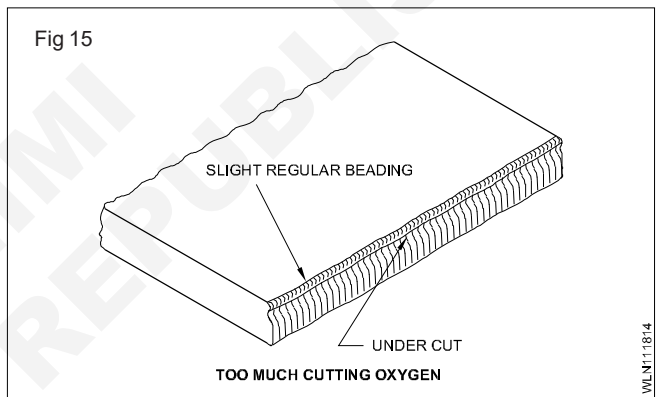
Extremely slow cutting speed. Pressure marks on the cut face indicate too much oxygen for the cutting conditions. Either the tip is too big, the cutting oxygen pressure is too high, or the speed is too slow as shown by the rounded or beaded top edge. On reducing the cutting oxygen volume to the correct proportions for the thickness of the cut, the pressure marks will recede toward the bottom edge until they finally disappear.
